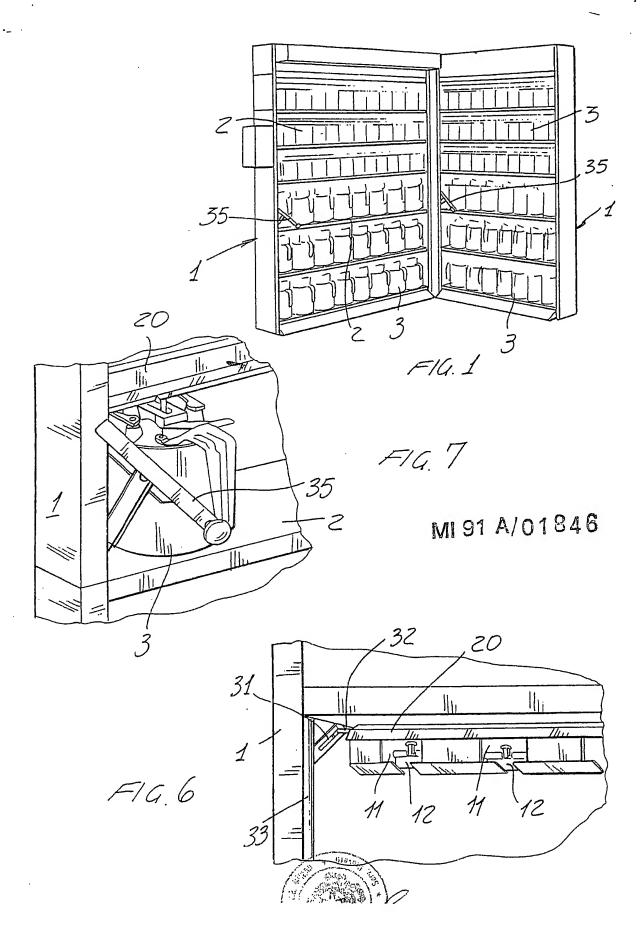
shows, in perspective view, the details of a channel, with the protection section in the open position.
